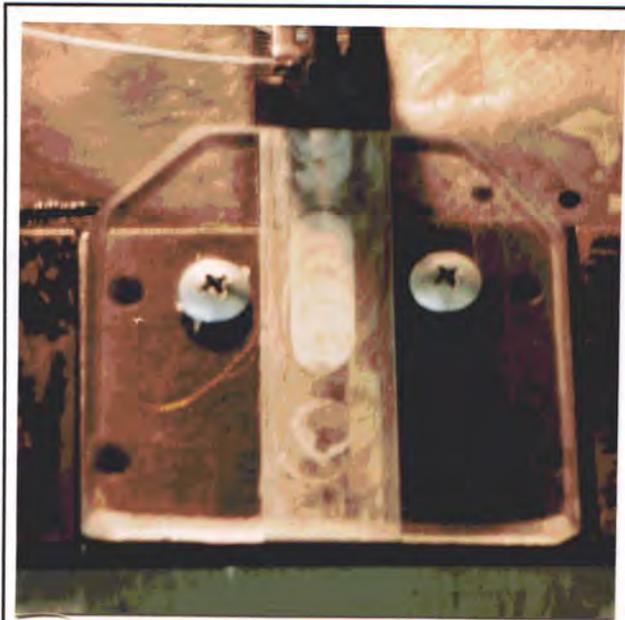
This photo shows details of the 'guide plate' which mounts on the sliding attachment plate in front of the presser foot.
